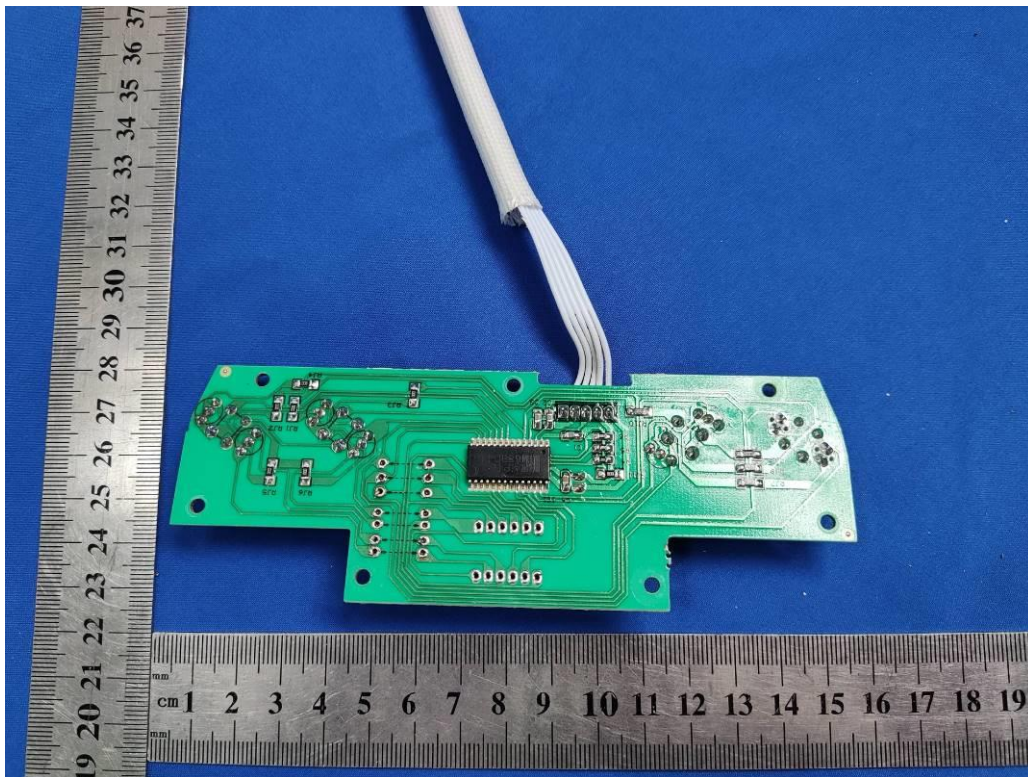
Control PCB view (4700 GENSE, CM1670A)
